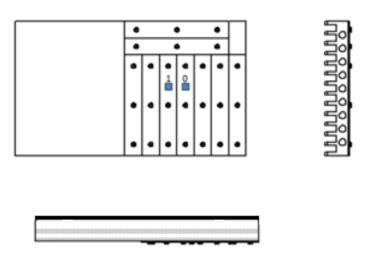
CAD views of the LED with heat sink, showing the location of thermocouples.
